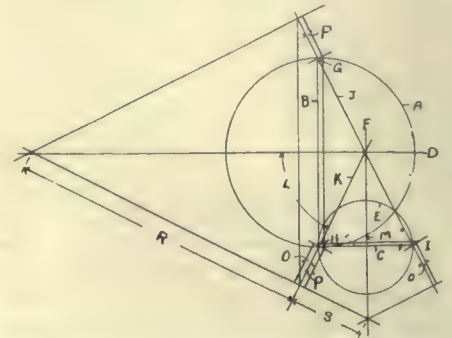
Layout of a Set of Parallel-Depth Bevel Gears.
